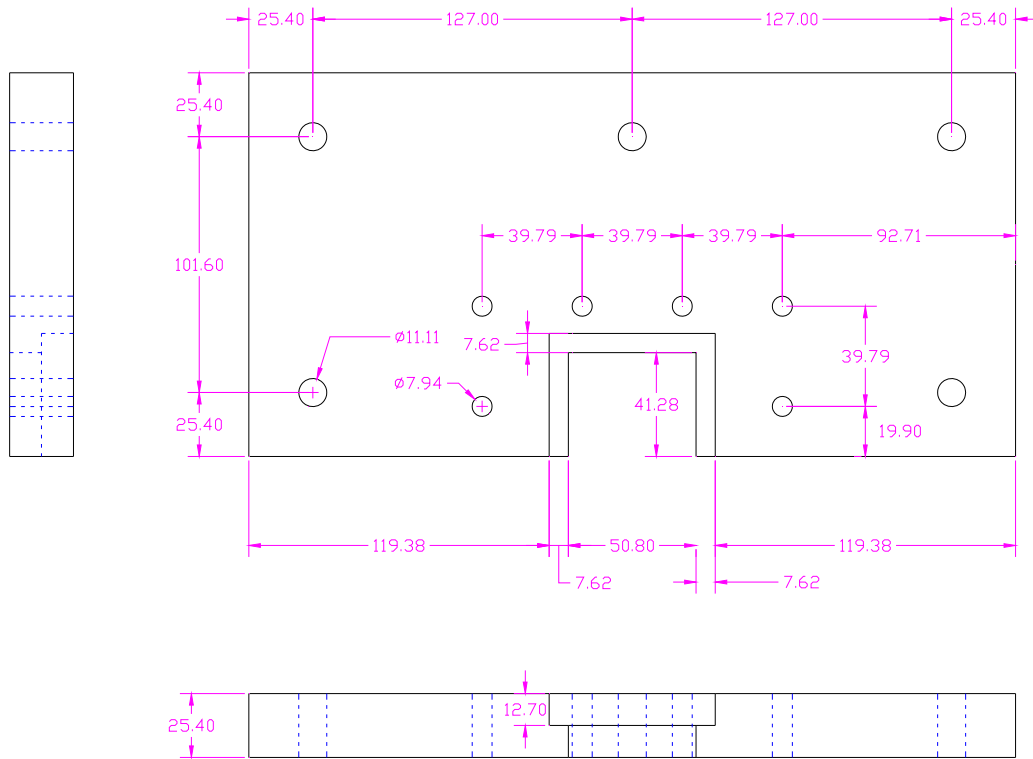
Design drawing for part #5, a total of four pieces (all values are in mm)
